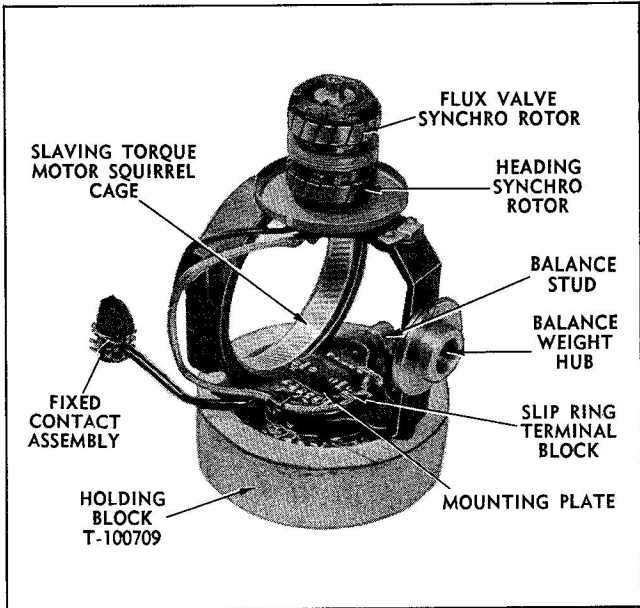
Vertical Ring Assembly in Holding Block T-100709
